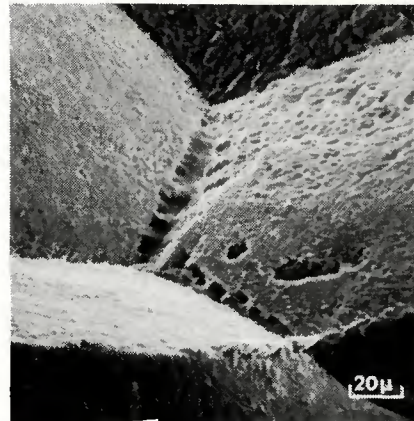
Ti-6246 fusion zone fracture in solution heat treated and aged specimen showing intergranular failure with ductile dimpling at grain boundaries. X500, reduced 35%
